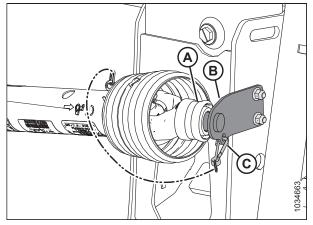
Driveline in Storage Position – Driveline B7038 or B7039
